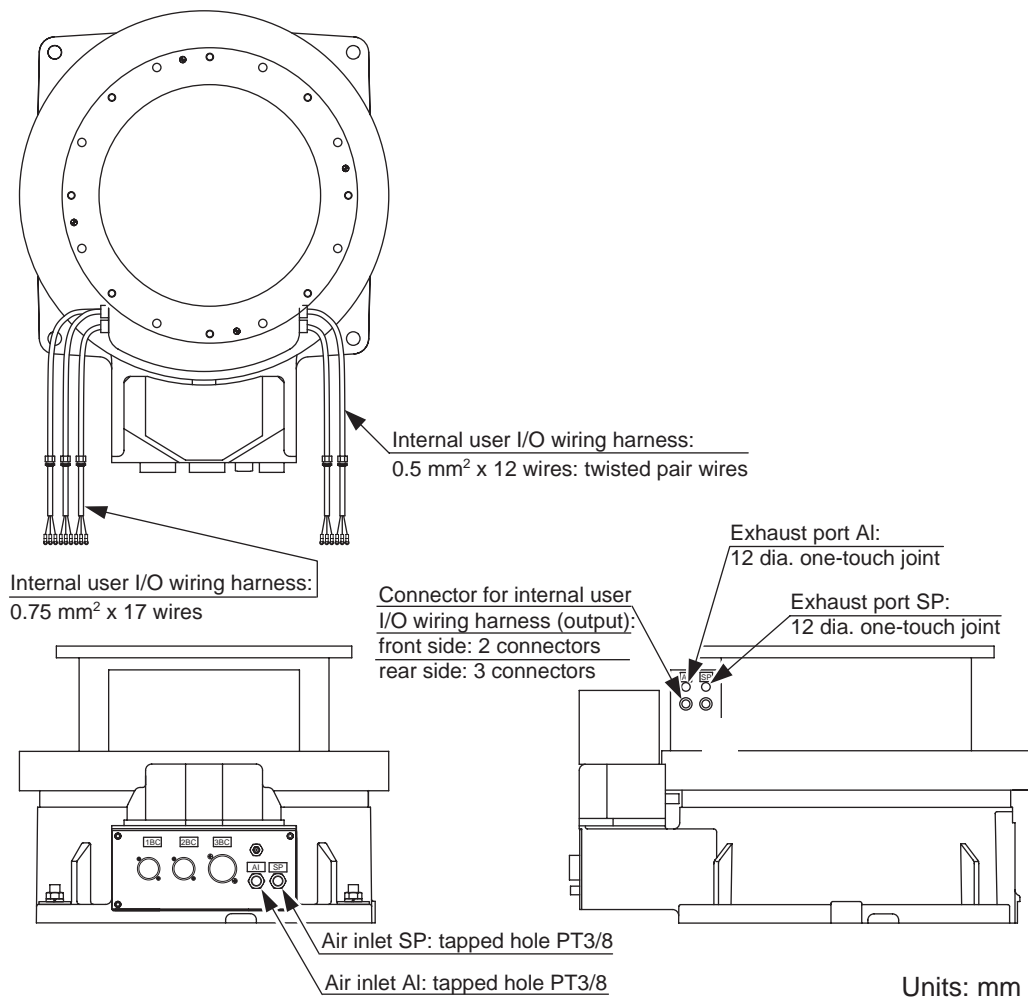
Internal User I/O Wiring Harness and Air Lines
